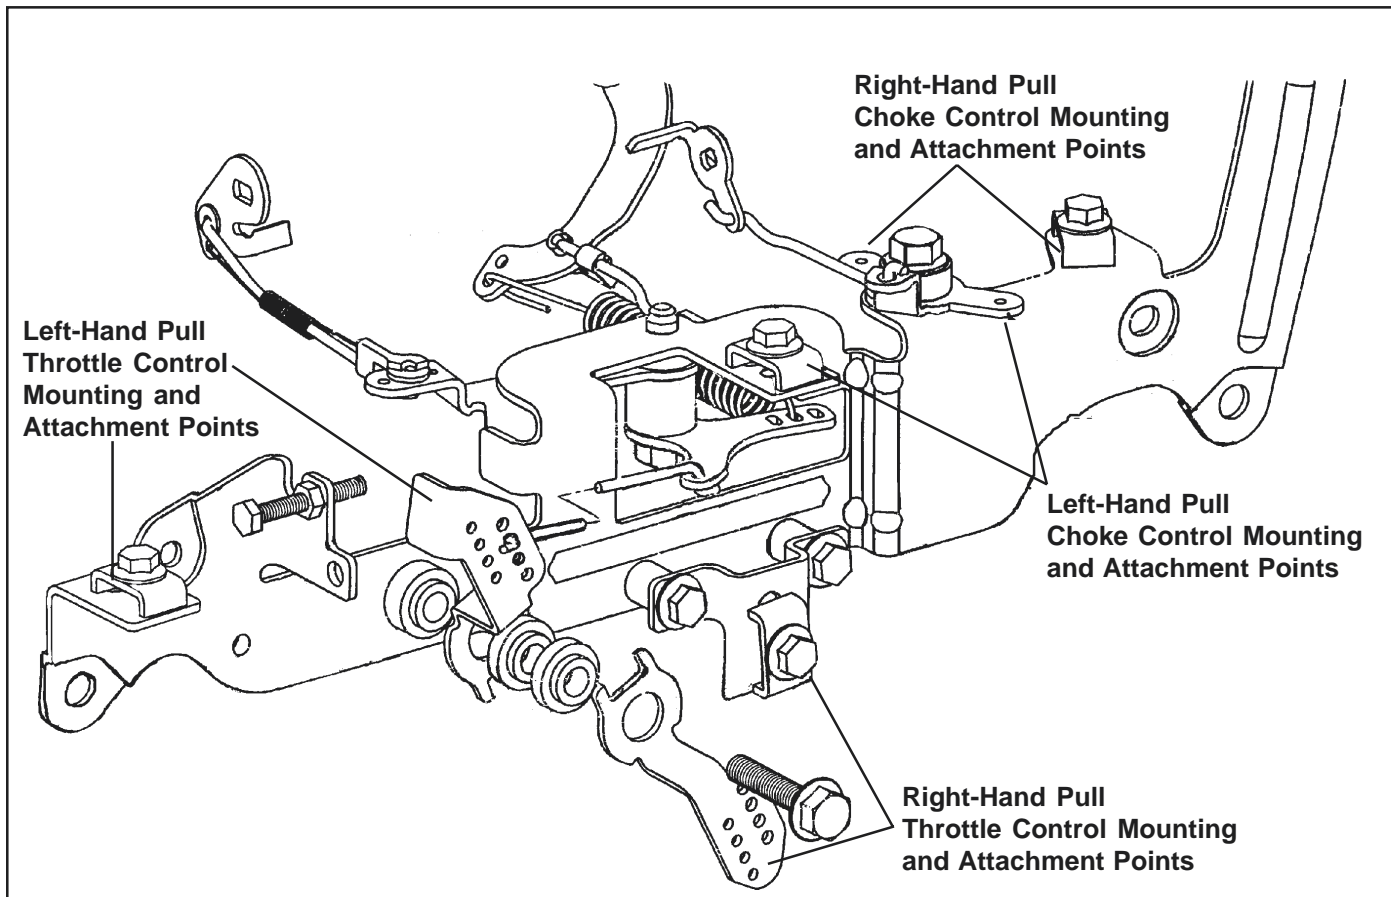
OHC Twin Horizontal Throttle and Choke Controls.
